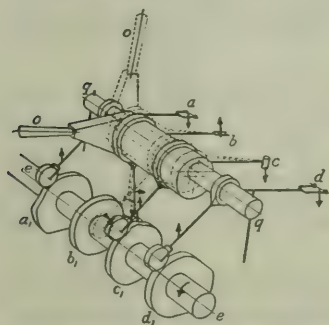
Usual method of actuating valve gears of Diesel engines having four-stroke cycle.
